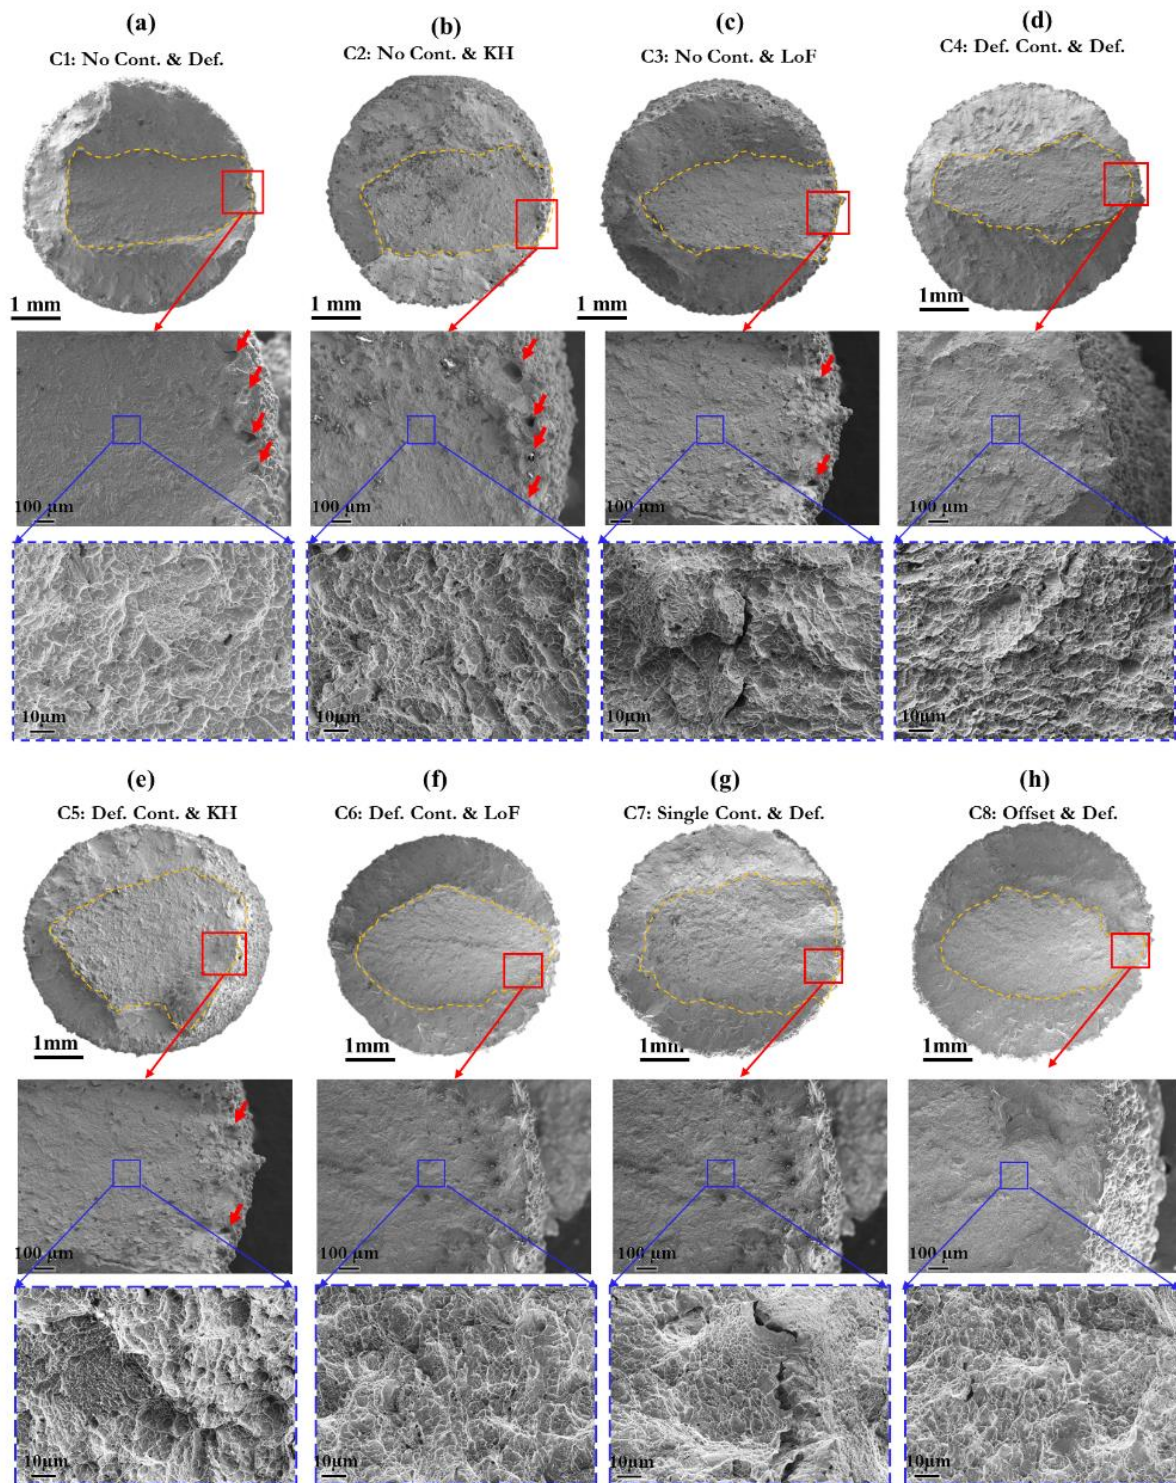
Tensile fracture surfaces of specimens for all the process conditions. Red arrows point at the near-surface volumetric defects.
